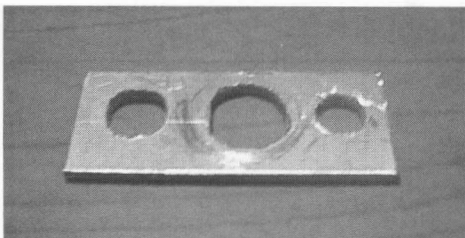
The doubler plate made of PCB material. Note the center hole, which has been filed out to make a rough D shape for the BNC connector.
